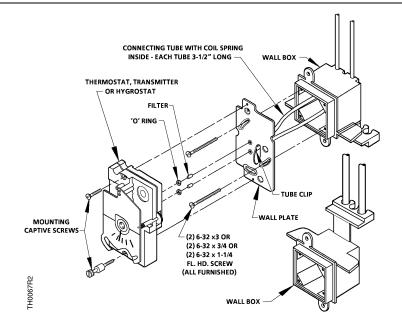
Mounting Wall Plate and Room Transmitter or Hygrostat with Wall Box Kit No. 192-478 or 192-480.
